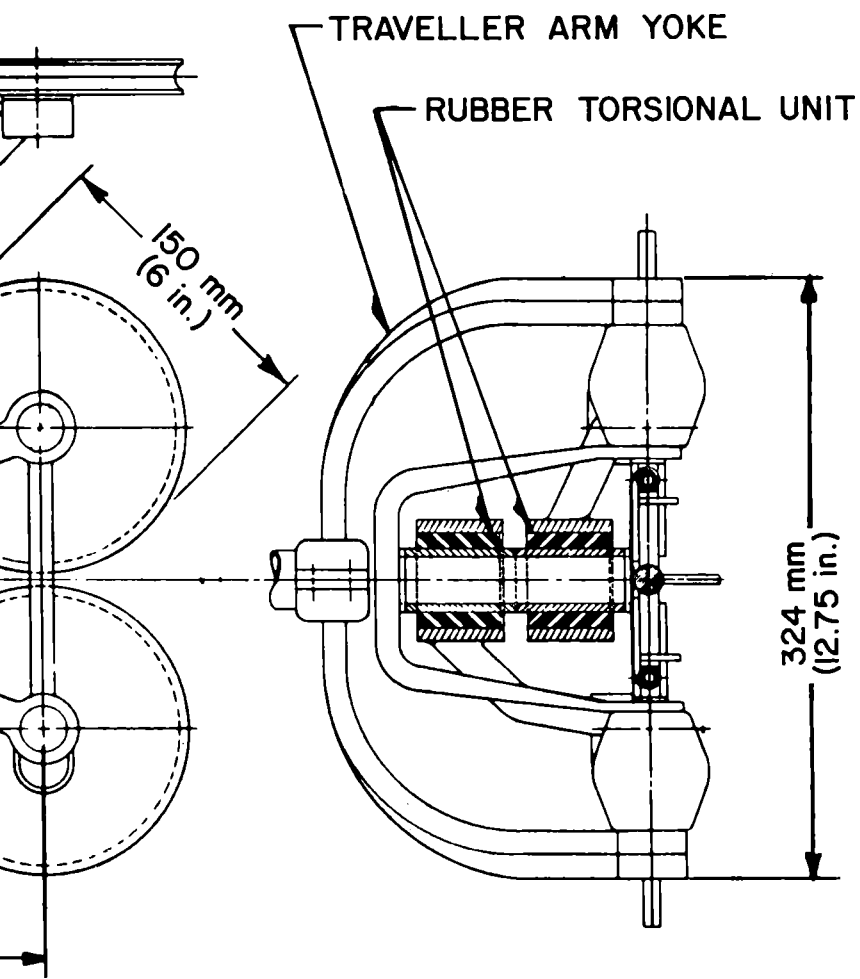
TRAVELLER WHEEL ASSEMBLY.
